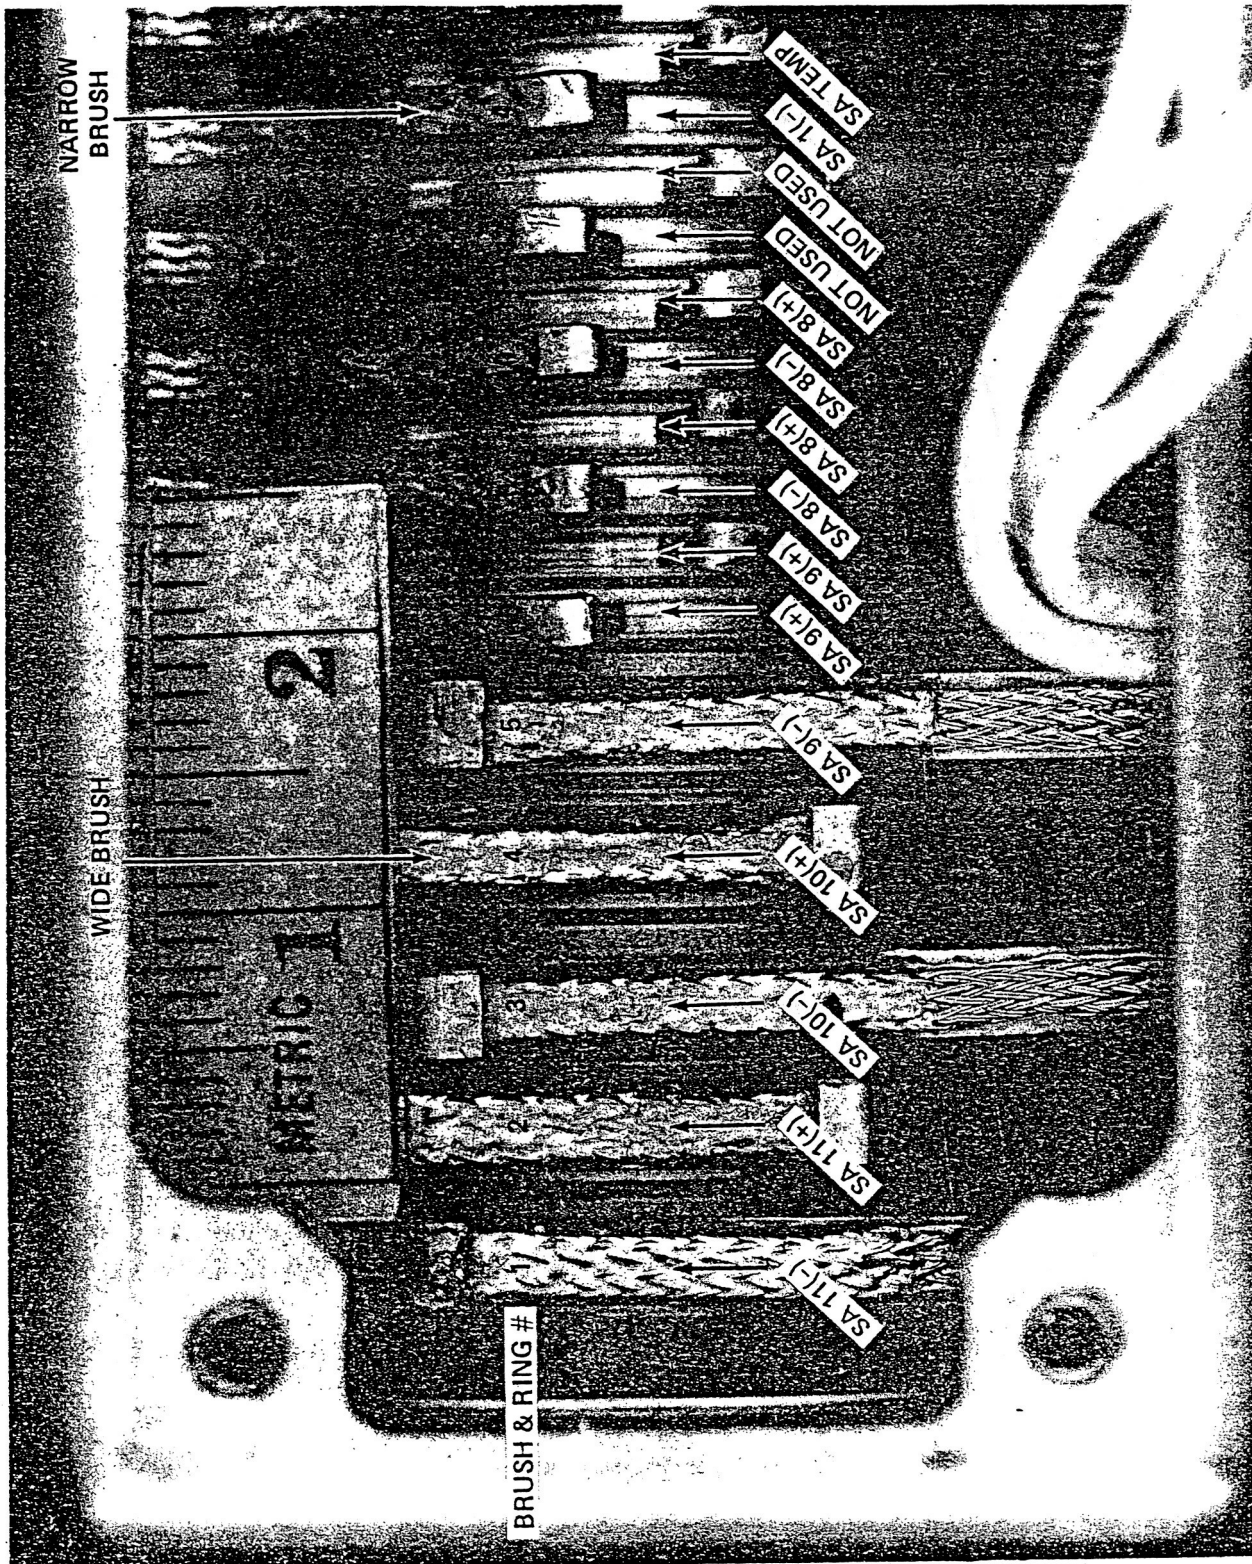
Slip Ring Assembly – Brushes 1-15 (Side Cover Removed for Viewing)
